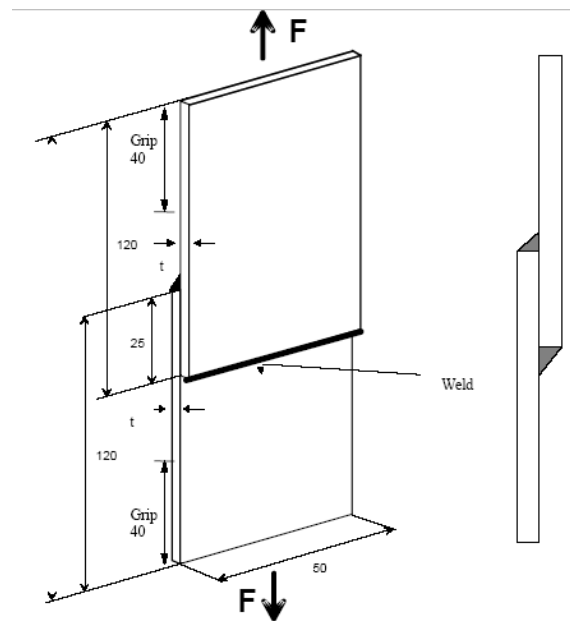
MIG Welded Double-Lap Shear Specimen
